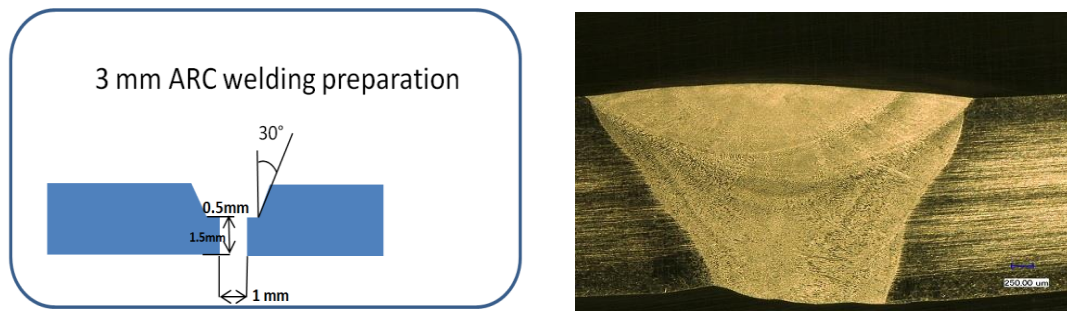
Joint preparation and bead shape for GTA welding
